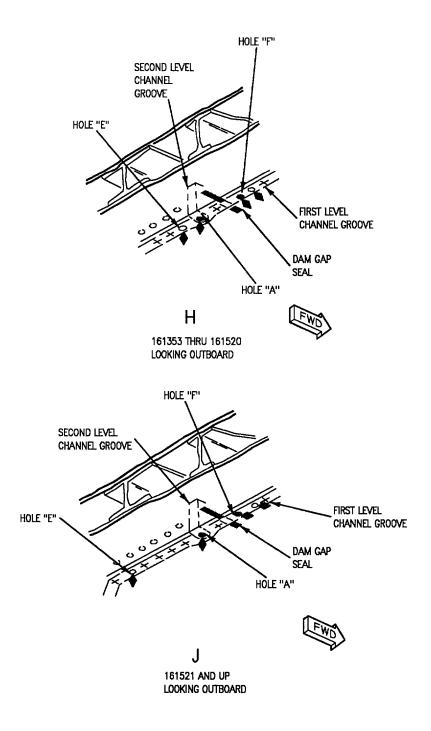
Rear Spar Channel Groove Seal Injection (Sheet 7)
